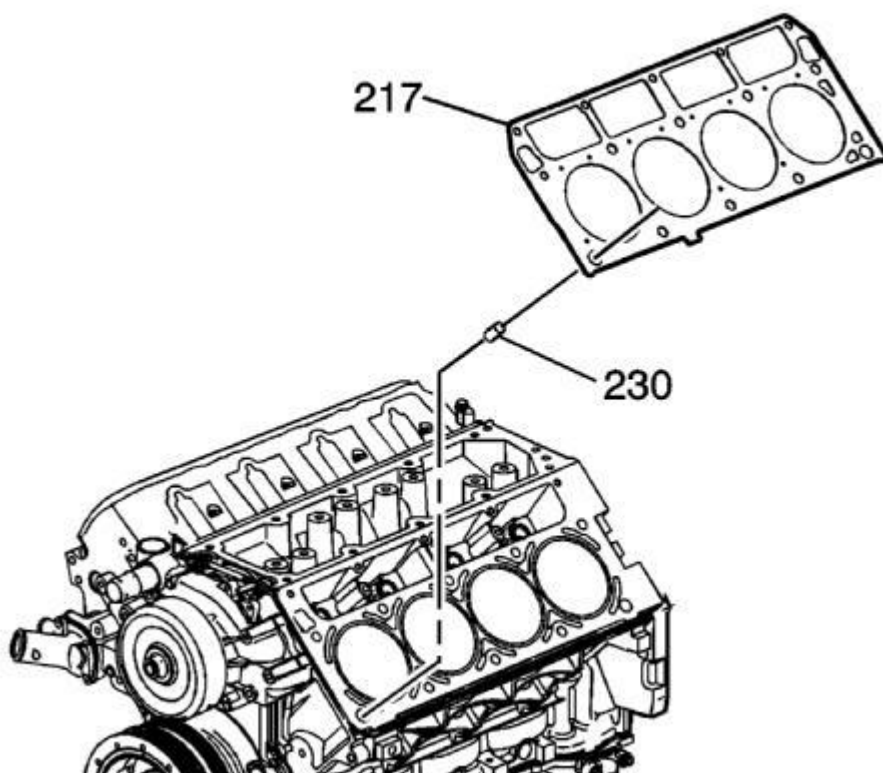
View Of Cylinder Head Gasket And Alignment Pin - Left
